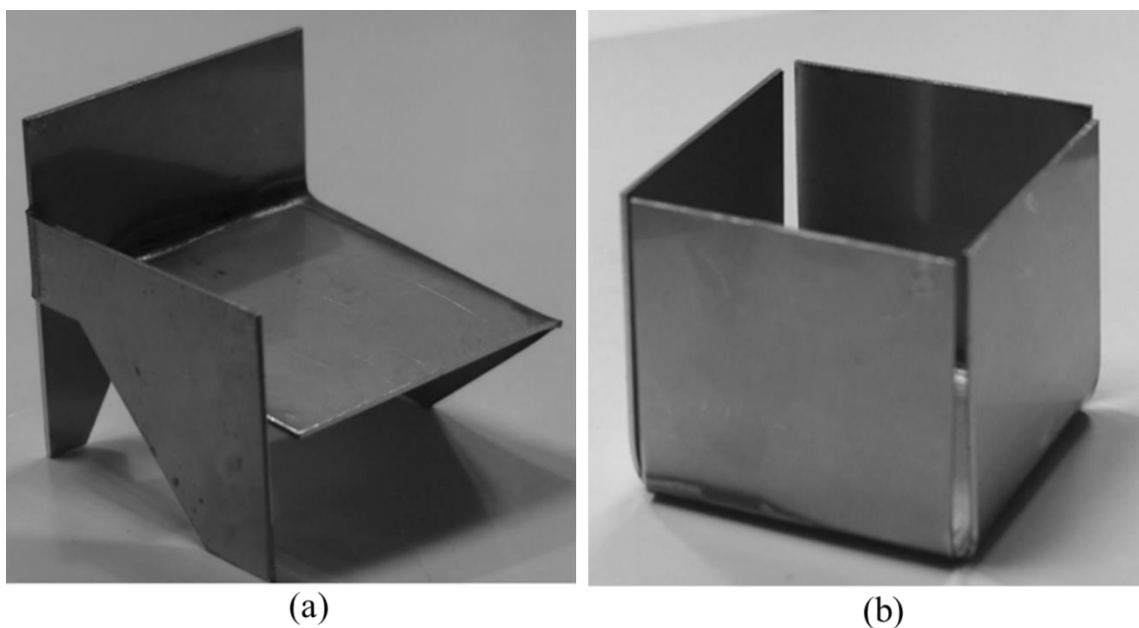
Complex shapes formed by forced assisted laser bending (a) design of chair, (b) cube
